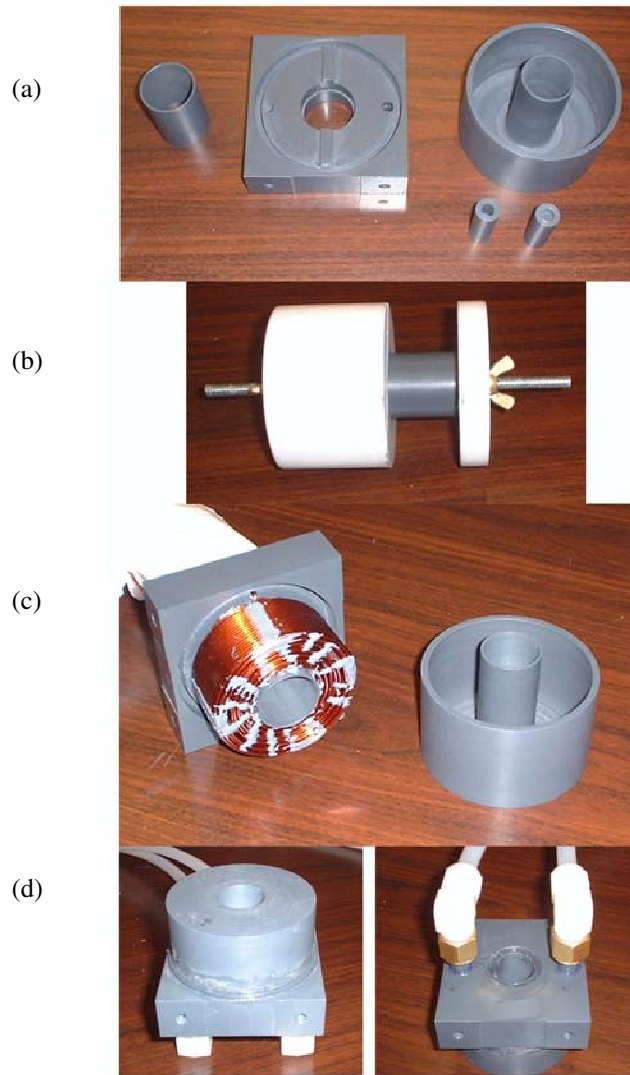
Assembly photos of a quadrupole coil. (a) The set of PVC parts. (b) The inner rod mounted in Teflon blocks for winding. The blocks are spaces so that the coil of wire is at the appropriate location. (c) After winding, the inner rod is cemented to the base piece. The cover needs to be added. (d) The completed coil bonded together with PVC cement and then welded with a PVC hot air welder. The magnet wires exit the coils in the water tubes.
